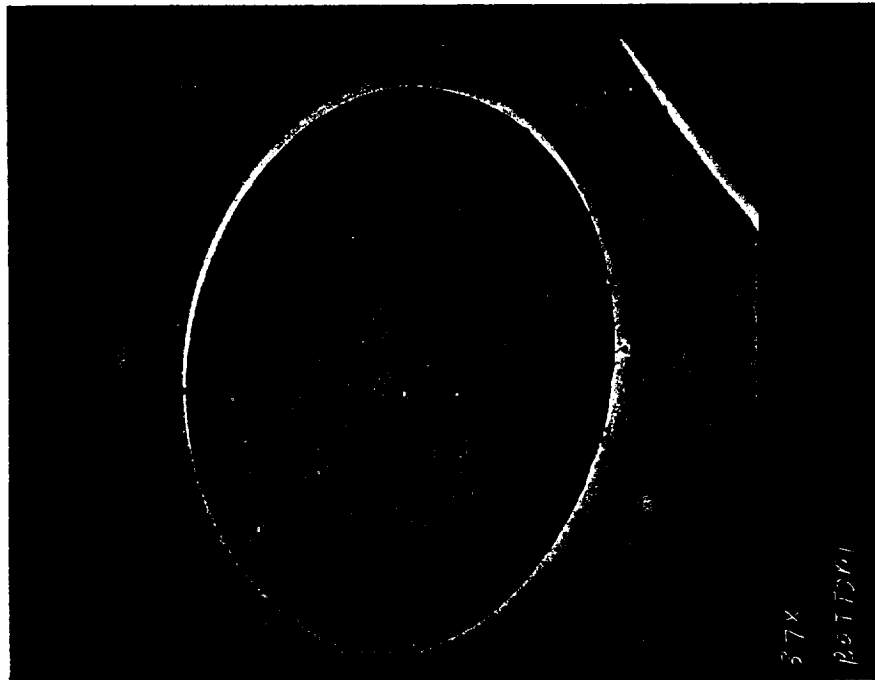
Armature Side of Bearing Journal of Good Pivot Bearing (37X)
